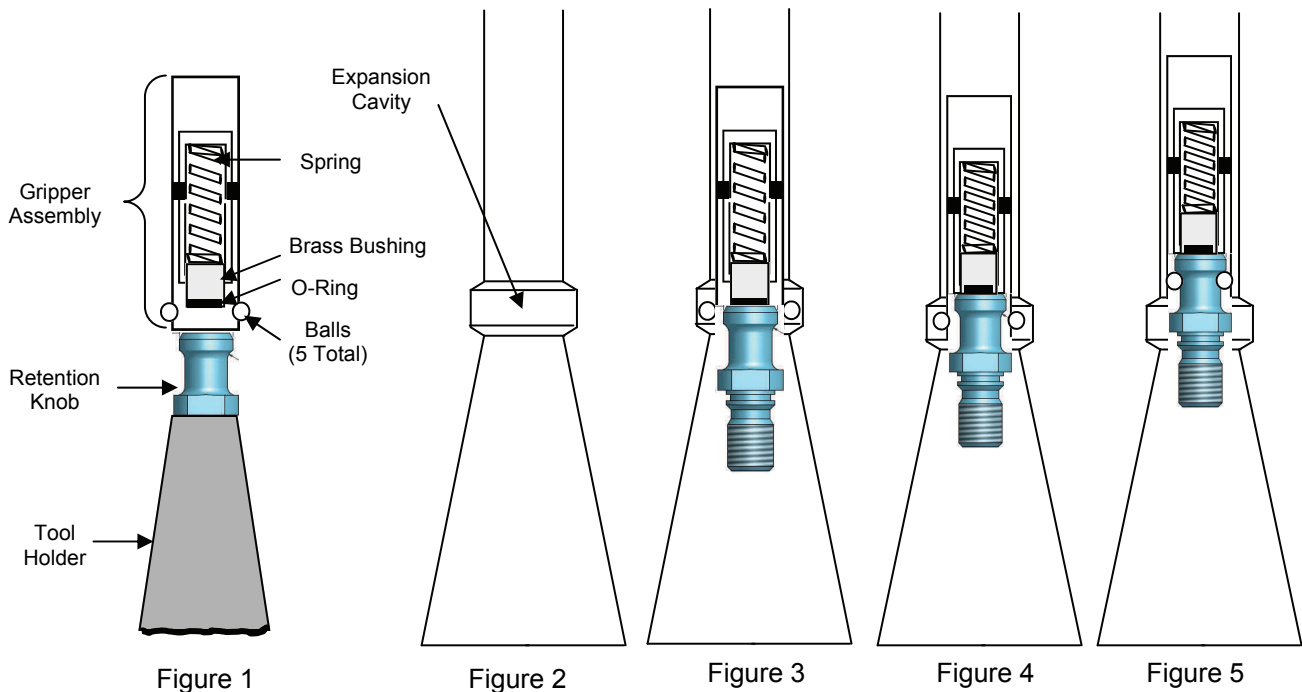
illustrates the gripper assembly's basic parts. The gripper is a tube about one inch in diameter. The brass bushing/O-ring assembly is free to move inside the tube, but is pinned in a way that it does not fall out. The spring pushes the bushing and O-ring downward.
